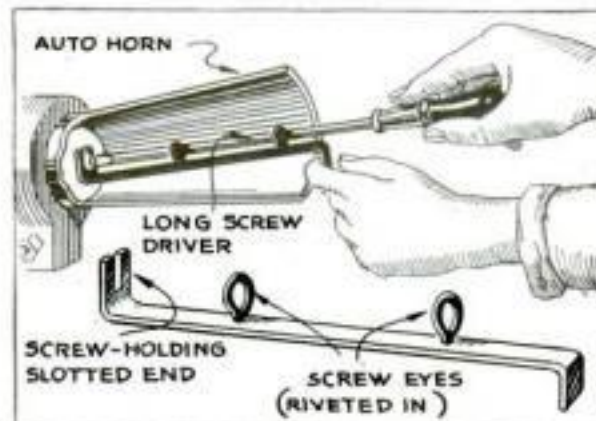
A slotted piece of flat iron or brass strip serves as a good and simple screw holder.
